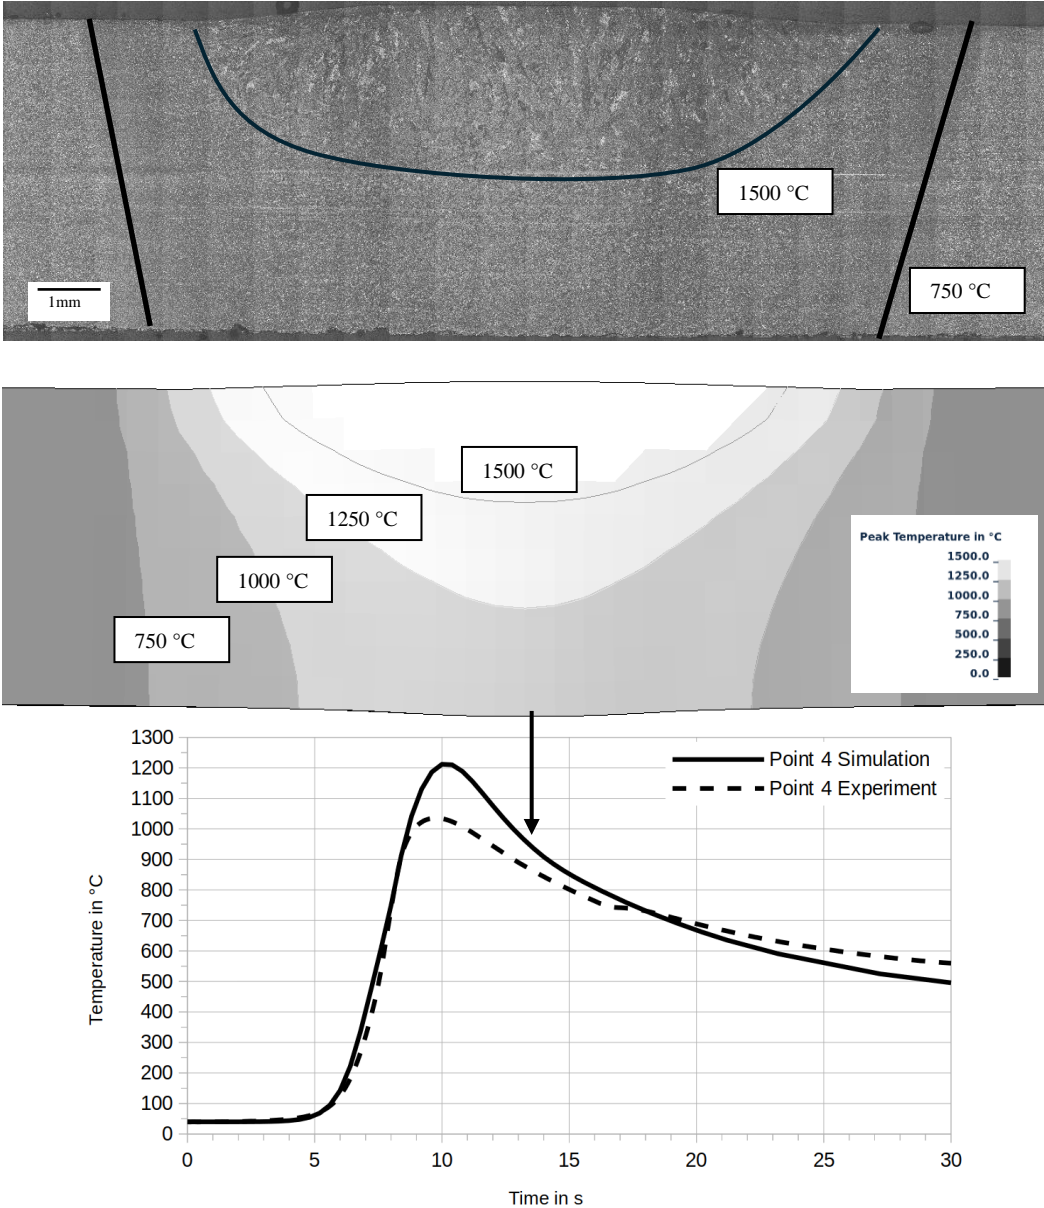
Macro section of welding and cross-section with peak-temperature of simulation. The HAZ lines are thick black and the solidification lines are thin black. The temperature progression was measured with TC on the bottom side of the welding seam.
